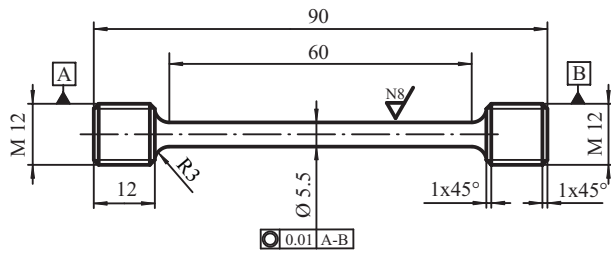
Creep specimen adopted for dissimilar metal welded joint testing according to ISO 204
